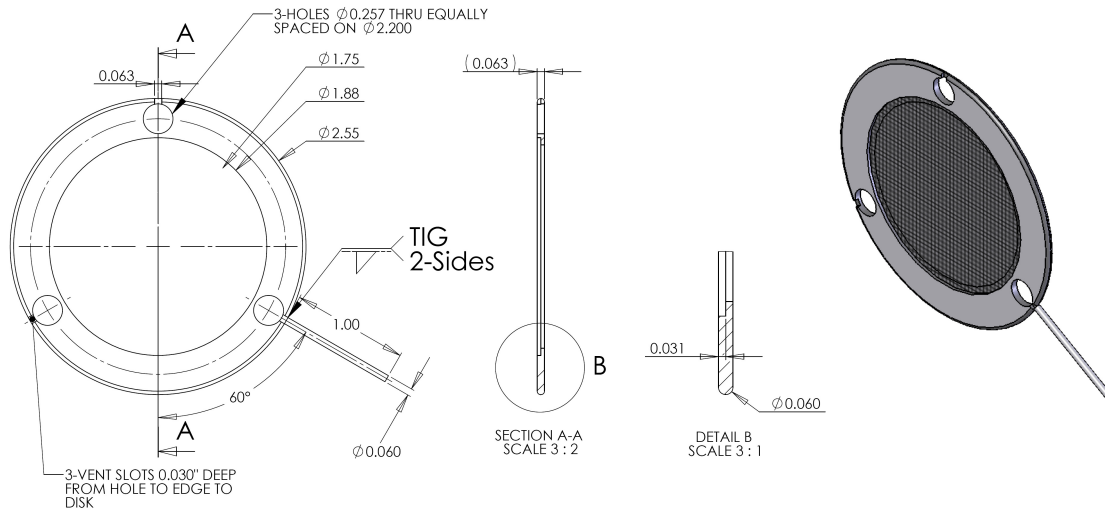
Technical drawing of one of the three RFA mesh disks with electrode stub. All measurements are in inches
